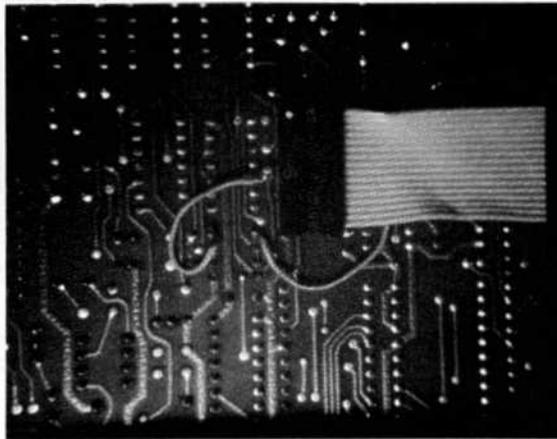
A close up of the added wiring to the RS-232-C board. See Fig. 2 also.
